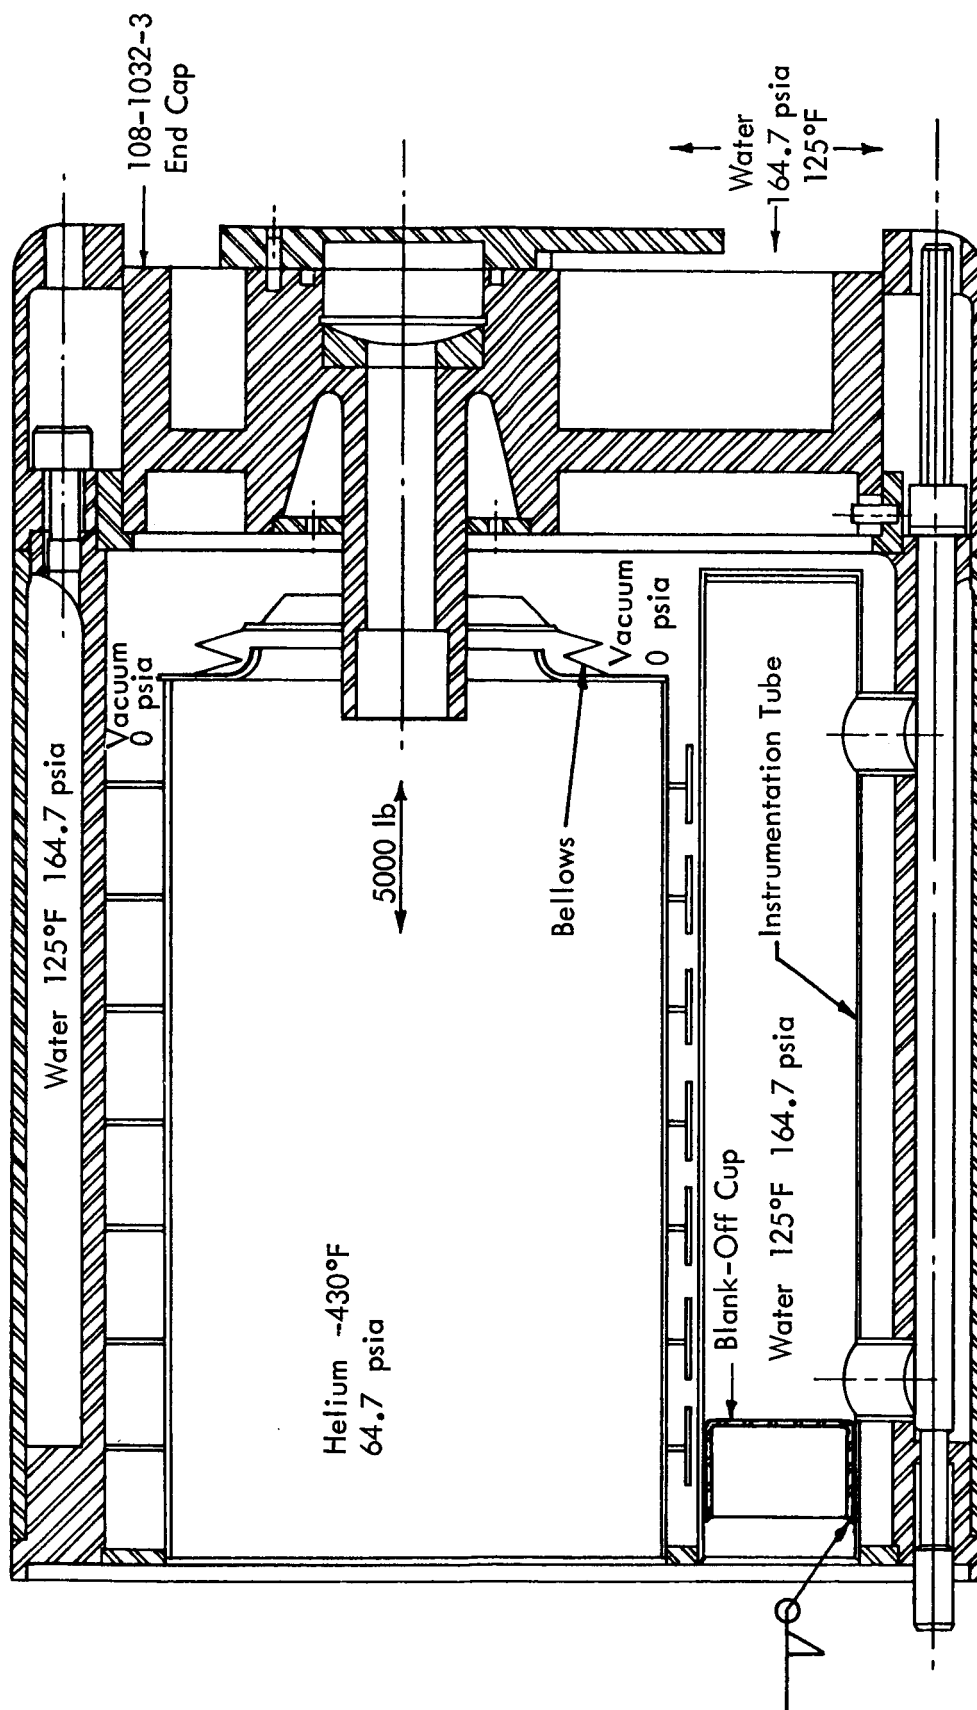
TEST LOOP HEAD ASSEMBLY WITH BLANK-OFF CUP
